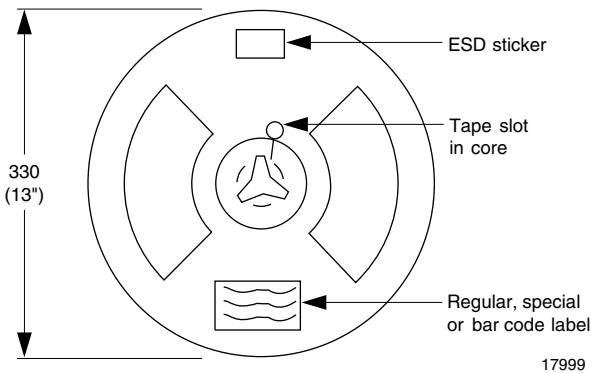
Tape and Reel Shipping Medium (EIA-481, revision A, and IEC 60286), 2000 units per reel
